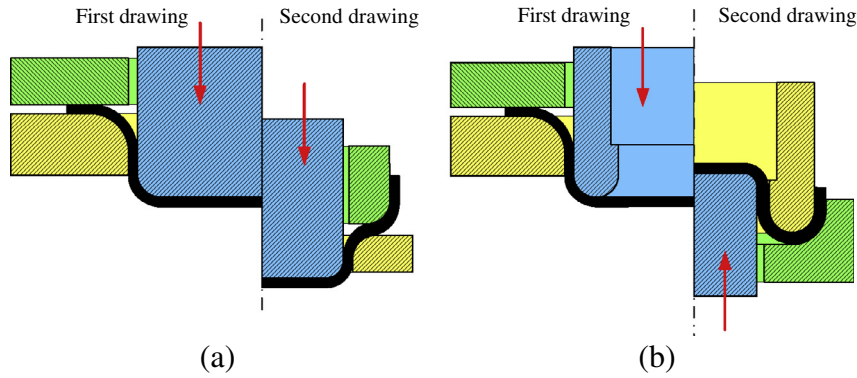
Scheme of the two-stage deep drawing process: (a) direct redrawing; and (b) reverse redrawing.
